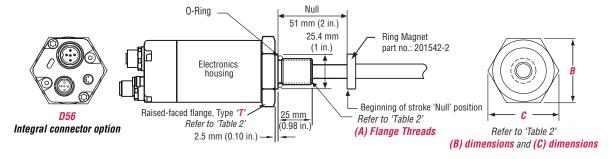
Model RH Rod-style sensor dimension reference (Shown with the D56 Integral cable connection type option)
